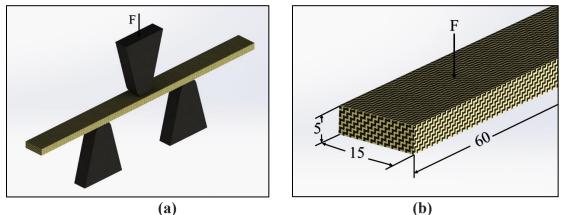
Flexural test specimen according to ASTM D7264, Test mode 1. (a) Test configuration. (b) Flexural specimen Dimensions.
